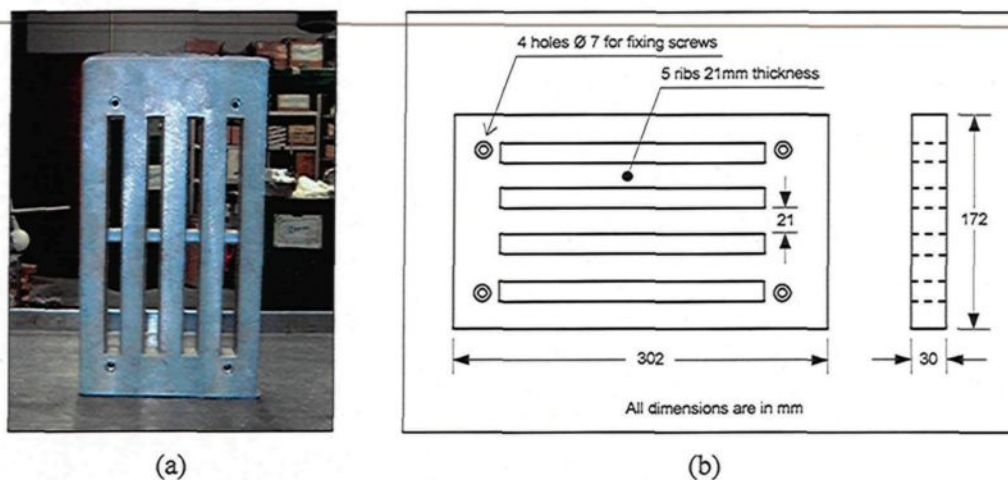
(a) Machinability test block; and (b) dimensions of machinability test block.
